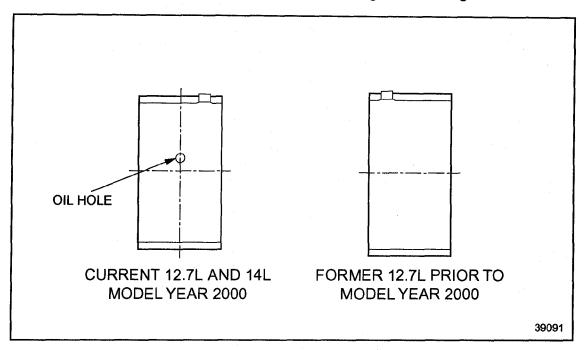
Connecting Rod Bearings for 14 L and 12.7 L Engines
